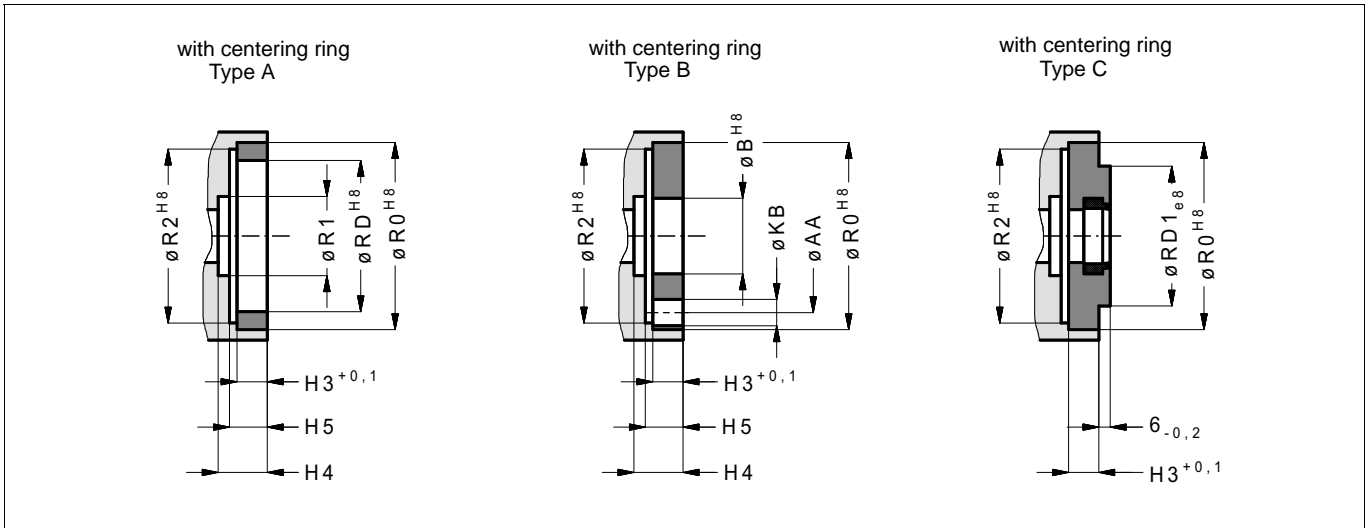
Dimensions for mounting possibilities Locking Unit KFHA
